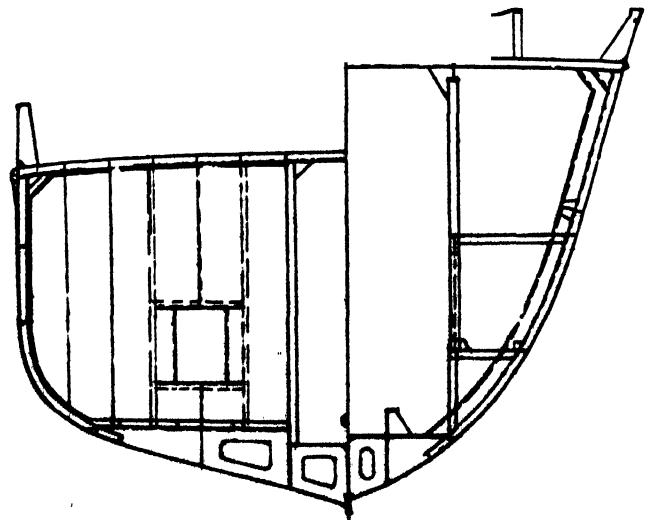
100×26×13.75 ft. (30.5×7.9×4.2 m.) all-welded steel combination trawler and tuna fishing vessel
